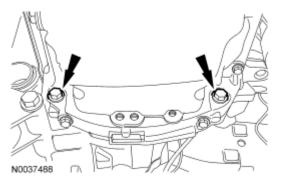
Locating Oil Pan-To-Bellhousing Bolts Courtesy of FORD MOTOR CO.
